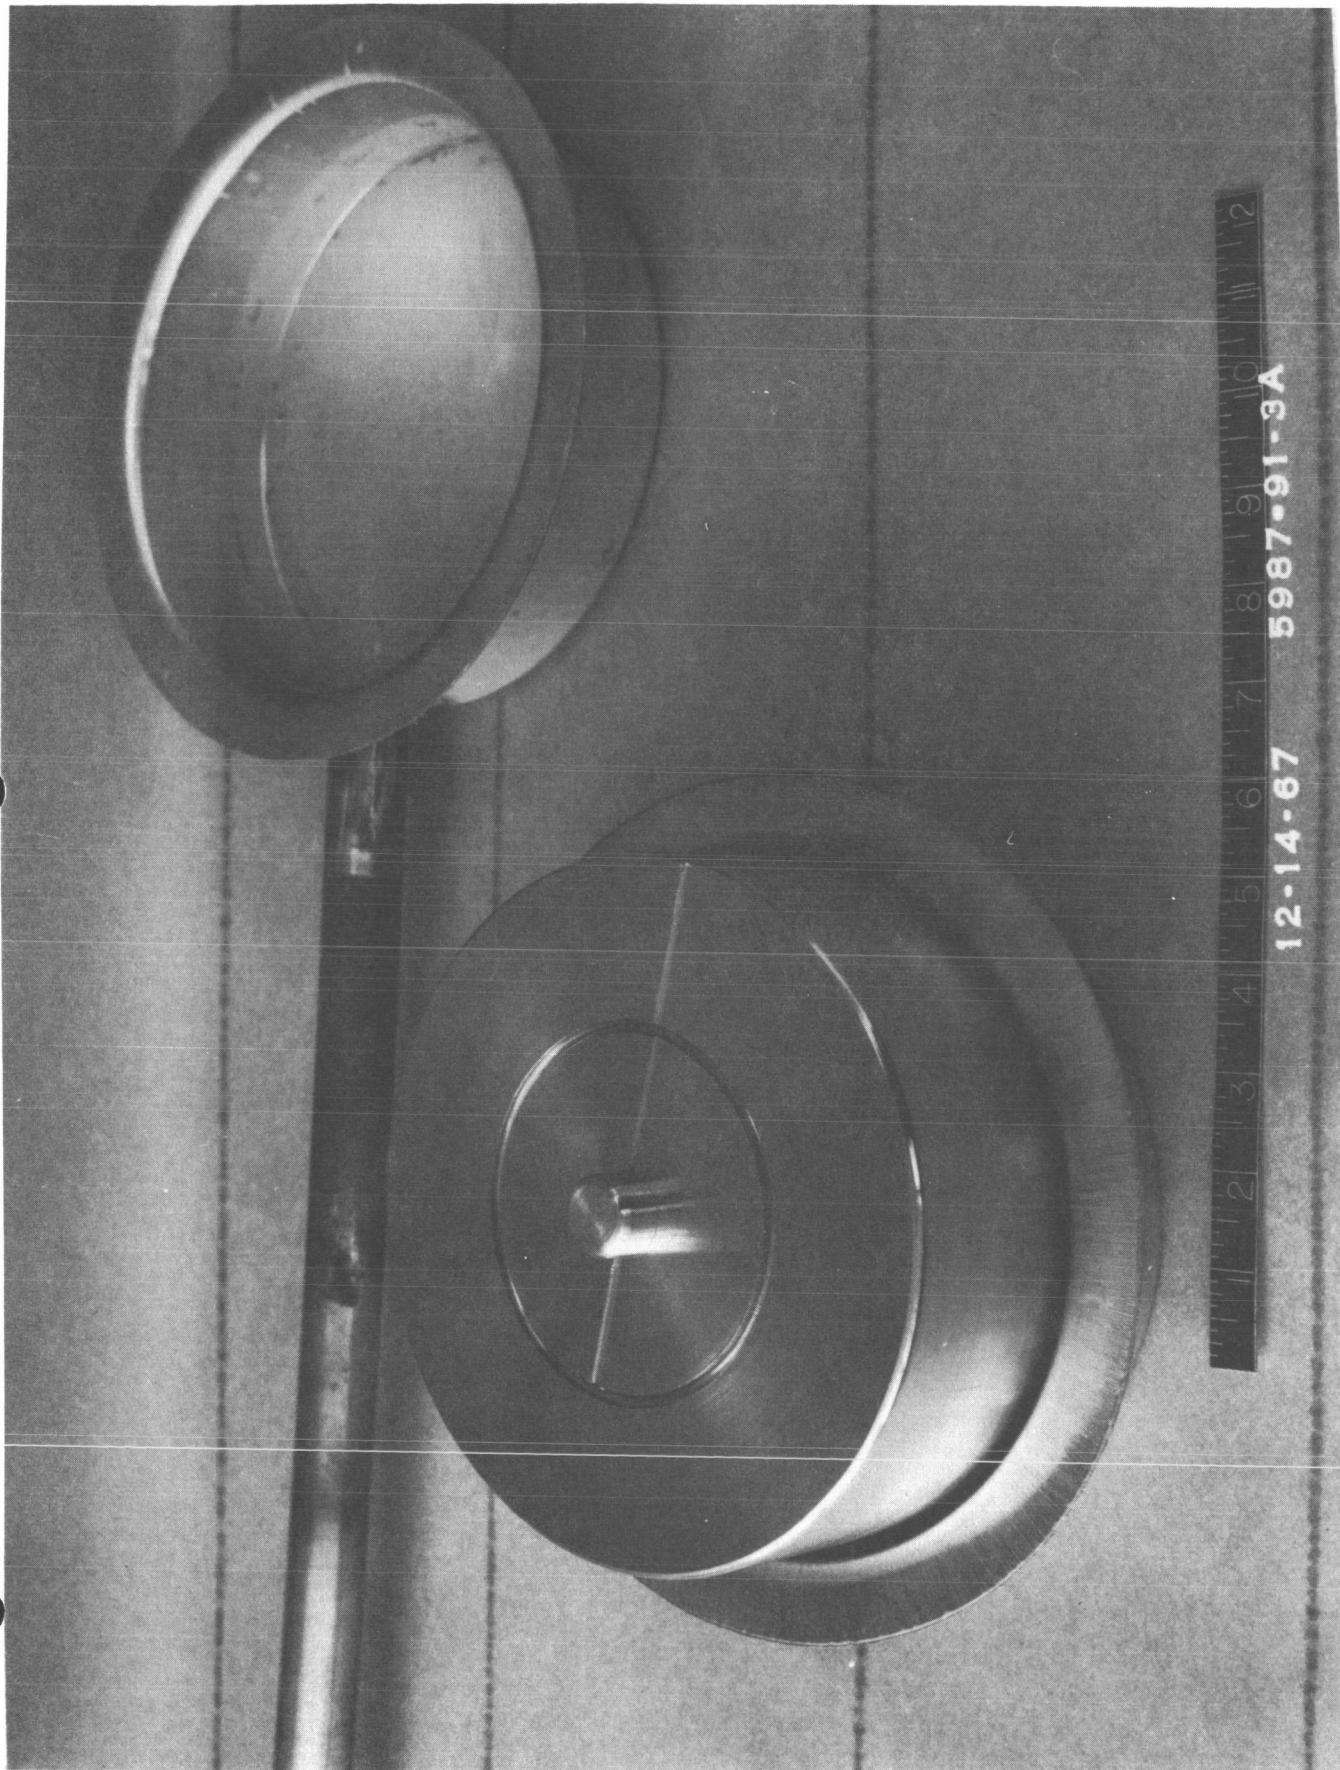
Assembled Views of 7/8 Inch Test Specimen and Tooling With Retort Cover Removed
